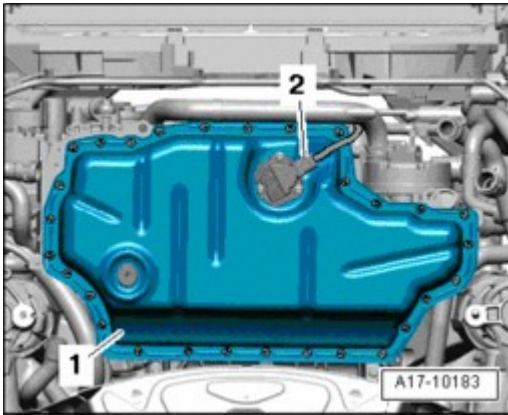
Identifying Oil Level Thermal Sensor G266 Electrical Connector & Oil Pan (Lower Part)
